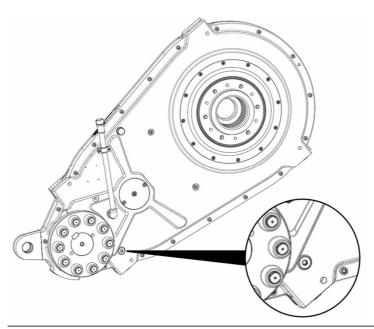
Oil drain screw – installation angle 25,6° to 38,2°
